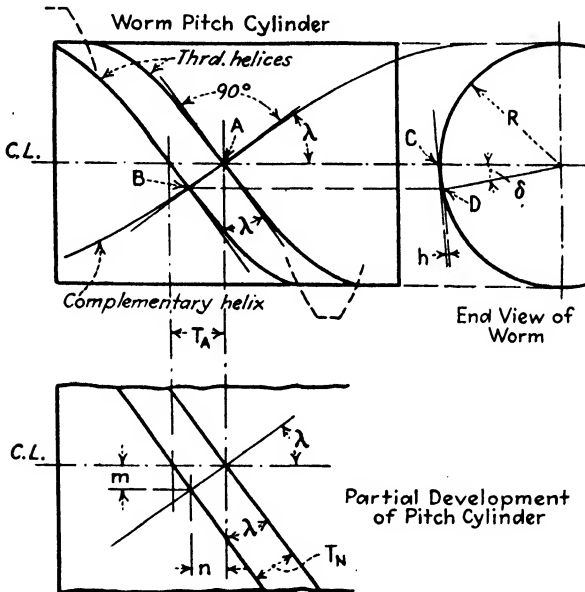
Normal chordal tooth dimensions of worm threads.
